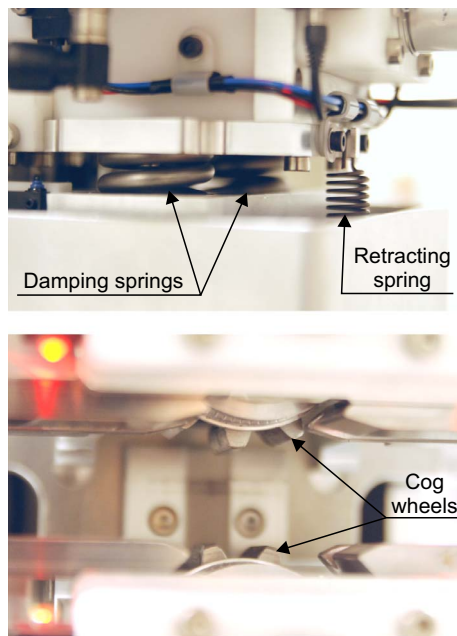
(a) The damping power springs and the retracting tension spring mounted between the lower feed wheel and the ball screw nut inside the robot cable feeder tool. (b) The two cog wheels, mounted inside a robot cable feeder tool, being fitted angularly to each other.
